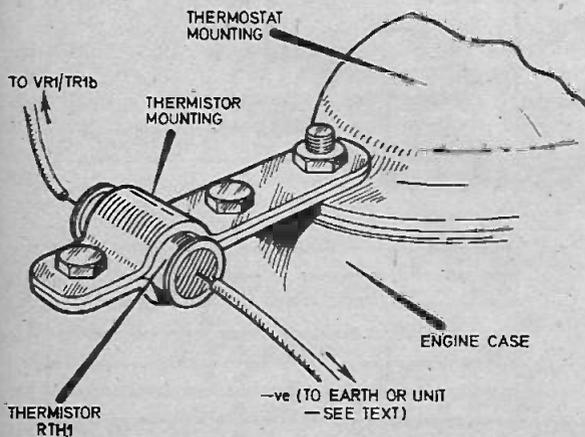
Method of mounting the thermistor to the thermostat housing on the engine. This may vary with different engines.
